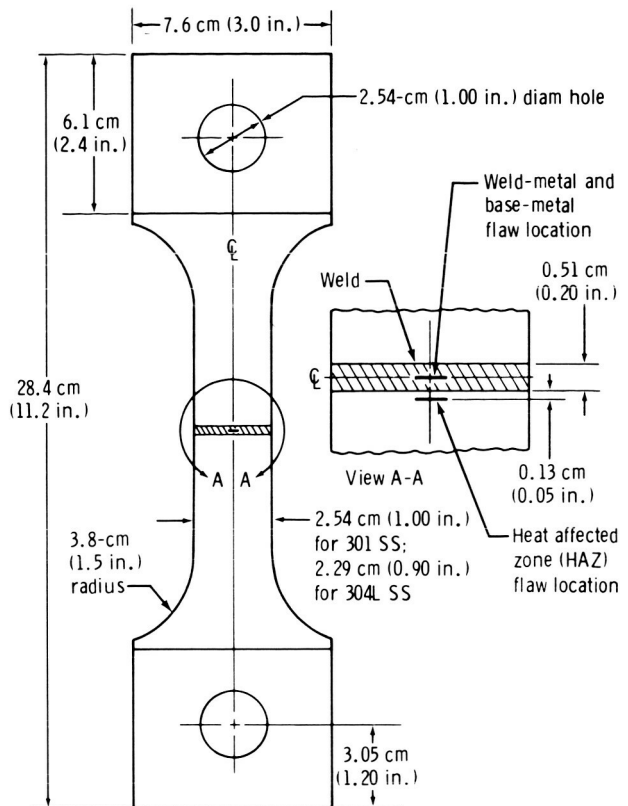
Cryoformed 301 and 304L cross-weld and base-metal specimen configuration.
